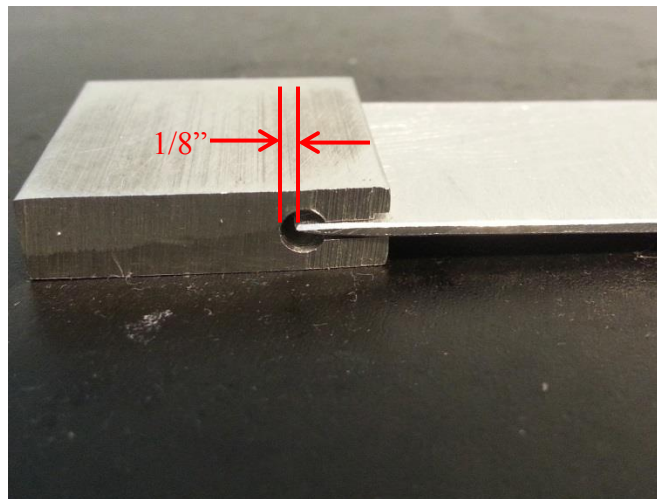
Mock-up assembly to mark how far to insert Alclad 2024-T3 strip.
